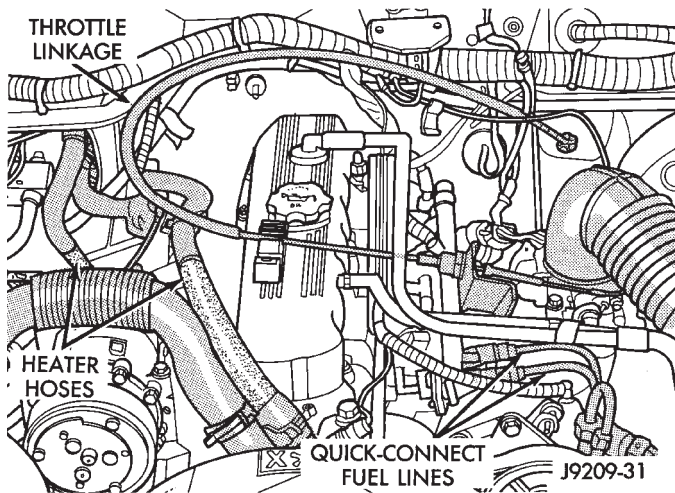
Heater Hoses (LH Drive Vehicles), Throttle Linkage & Quick-Connect Fuel Lines
